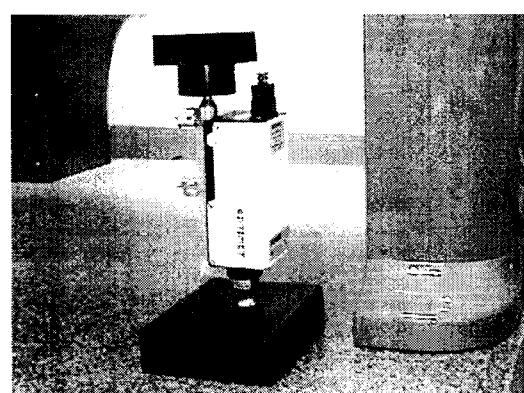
Burr of Electron Gun Measured by CMM (Coordinate Measuring Machine)
